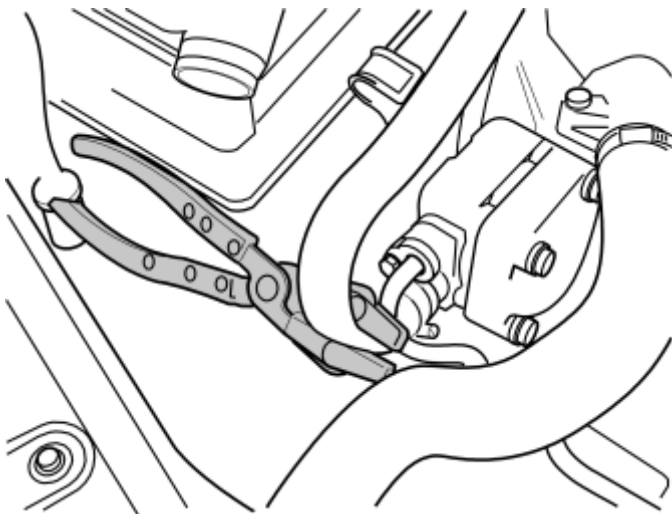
Identifying Lock Grip / Hose Pliers On Power Steering Pump Feeder Hose
